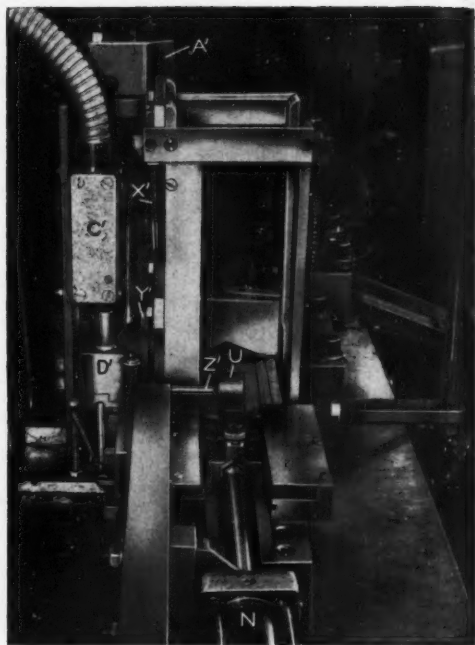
Close-up view of the feed mechanism for the multi-stage tool. A safety device stops the press if the feed motion has not been completed
